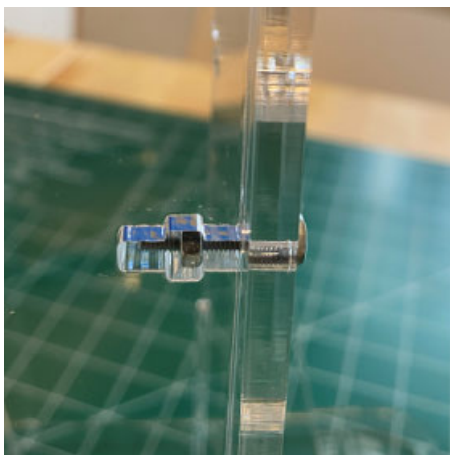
STEVAL-EDUKIT01 assembly sequence (6 of 11)
